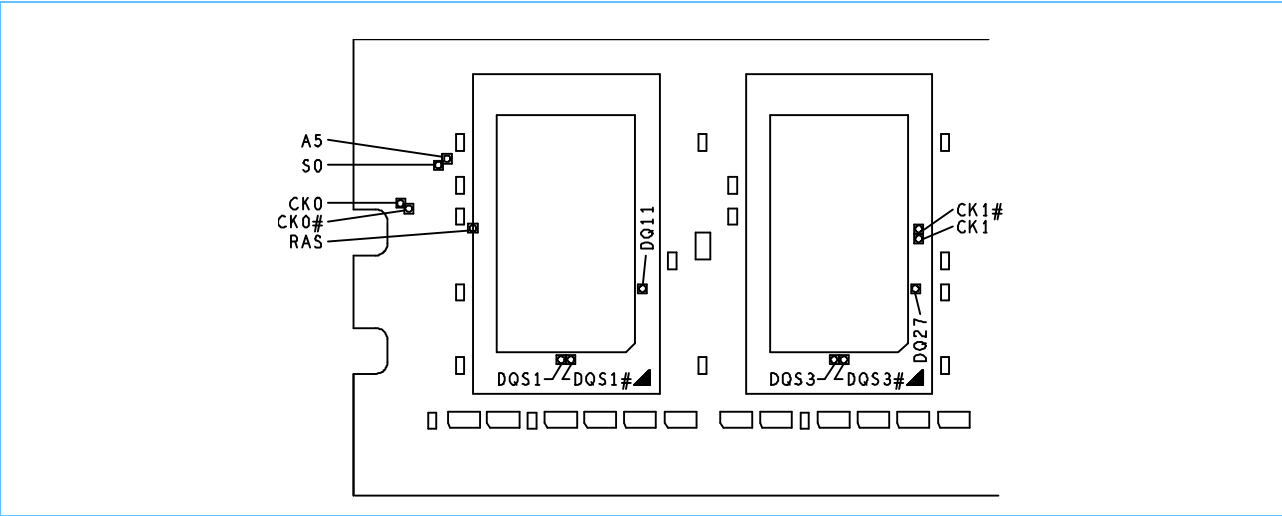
Test Point Identification (Raw Card Version F): Front, Left Side View
